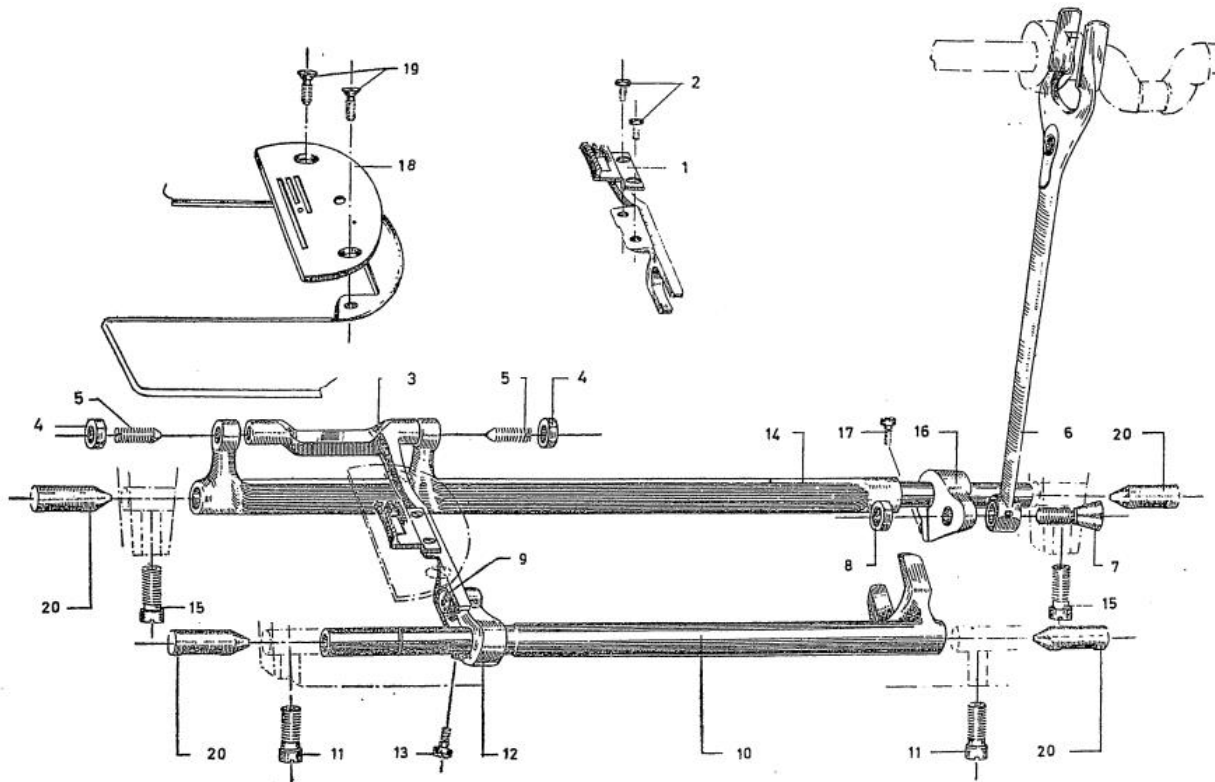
FEED FORK, FEED ROCK SHAFT AND FEED LIFTING ROCK SHAFT ASSEMBLY
